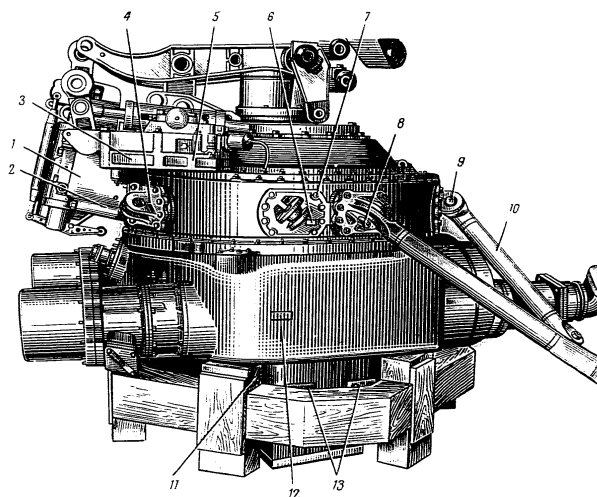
ATTACHMENT OF GEAR BOX BRACES TO MAIN GEAR BOX
